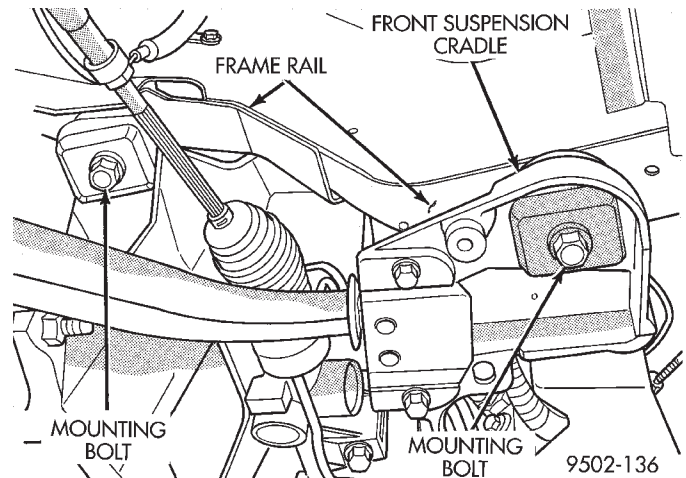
Suspension Cradle To Frame Rail Mounting Bolts
